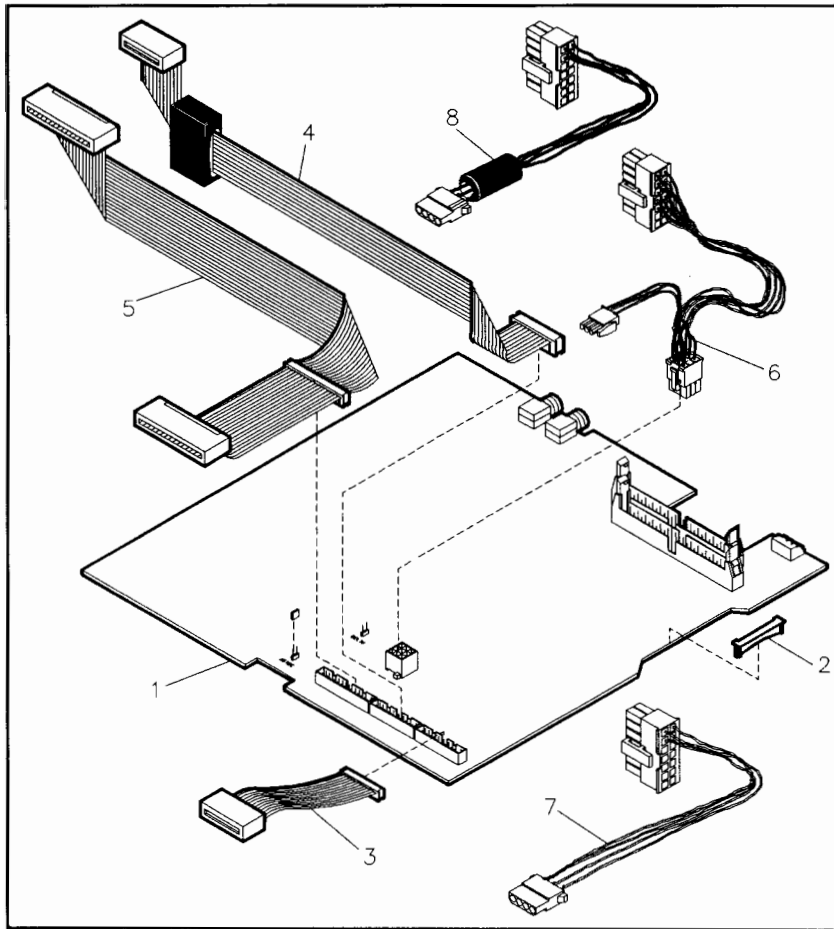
Model 1.34FL Controller PCA and Cabling, Exploded View
